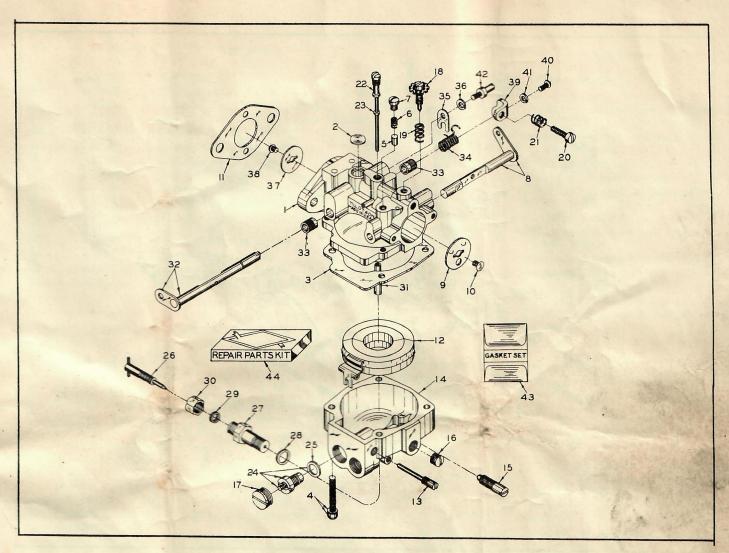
FLOAT TYPE CARBURETOR - EXPLODED VIEW
